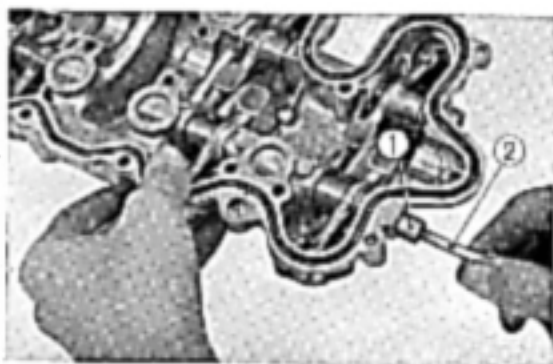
① Rocker arm shaft ② 6mm bolt
